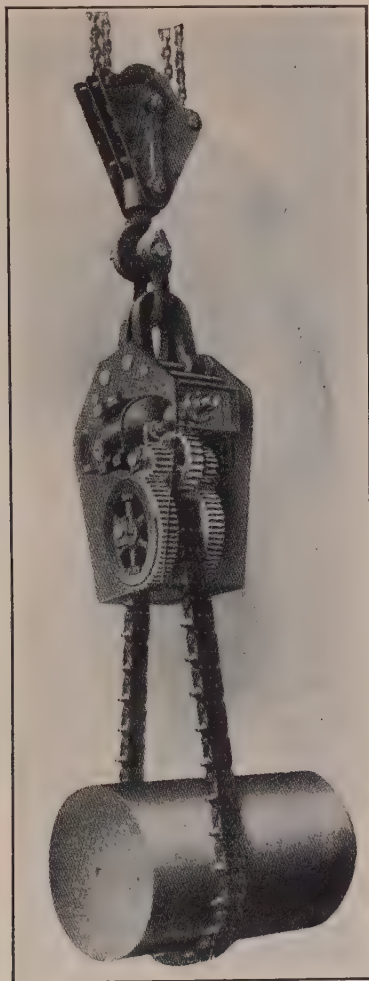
Electrically-driven Turning Gear for Rotating Forgings.
